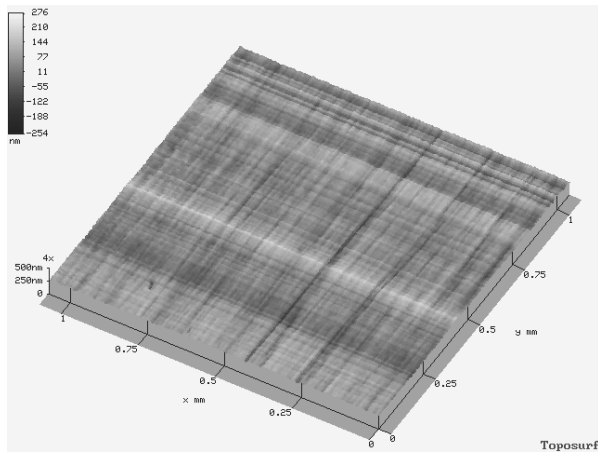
Isometric view of surface after CBN turning and finish belt grinding (HT1+BG1,2),  $S_{ra} = 0.02 \mu\text{m}$
